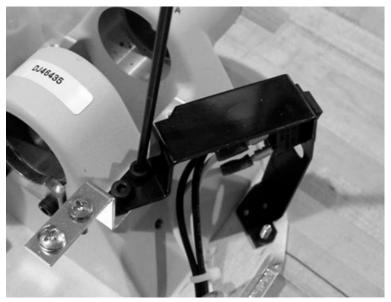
Removing the screws holding the Power Switch Bracket to the Casting
